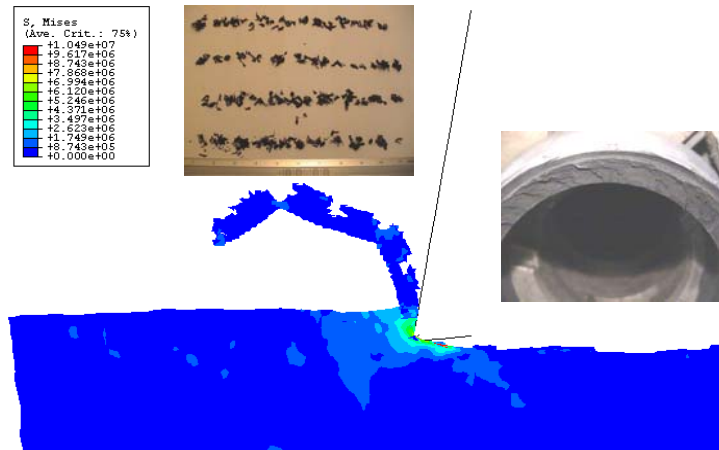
Discontinuous chips and rough machined surface with a tool of 10° rake angle.
